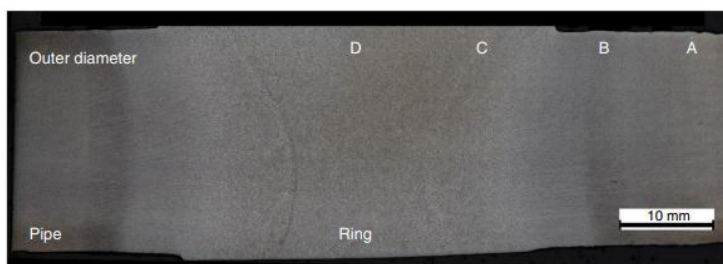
Cross section macrograph of the friction welded pipe.
